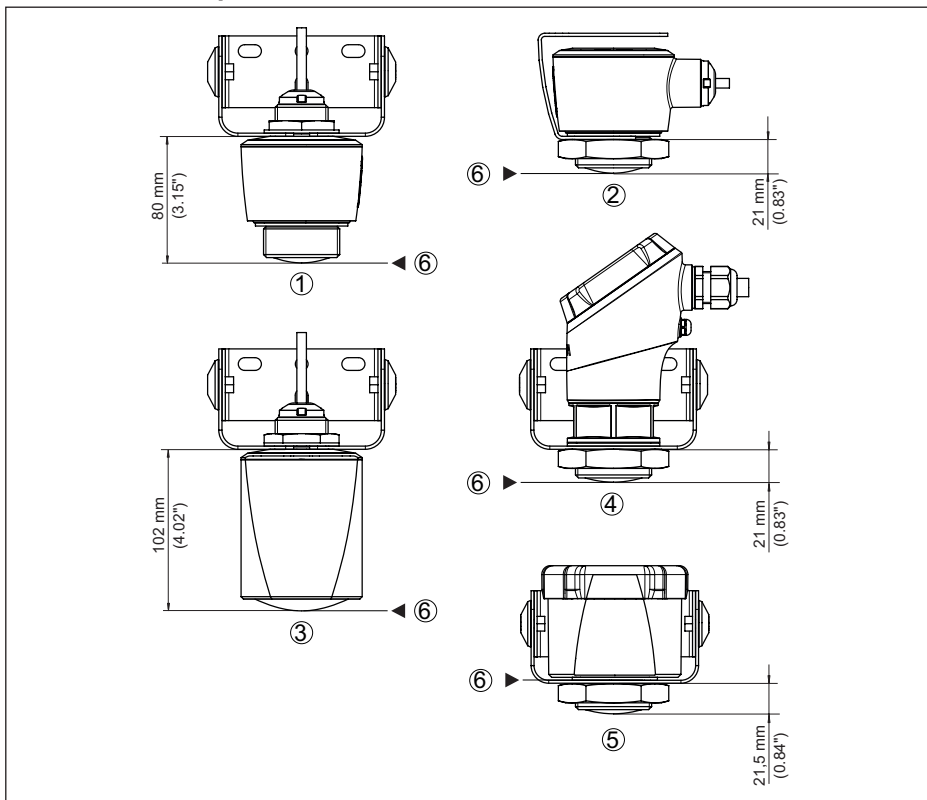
Mounting bracket for ceiling and wall mounting - Distance of the sensor reference plane to the bottom of the sensor holder
